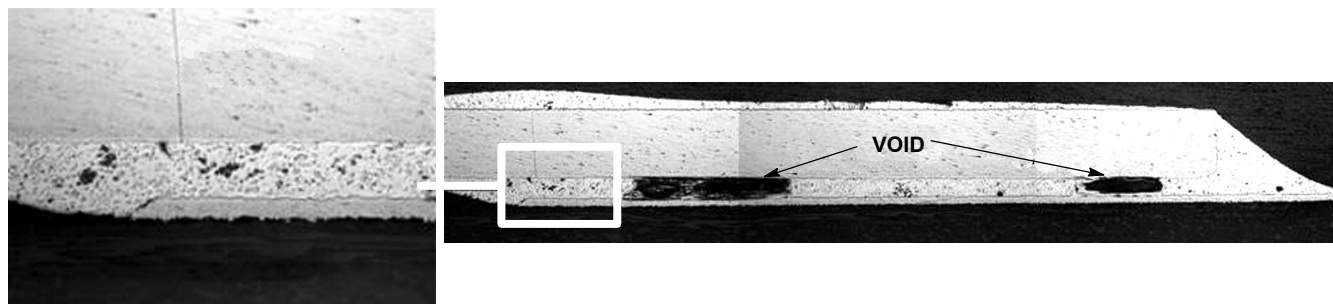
Solder Joint Cross-section Using SnAgCu Alloy
